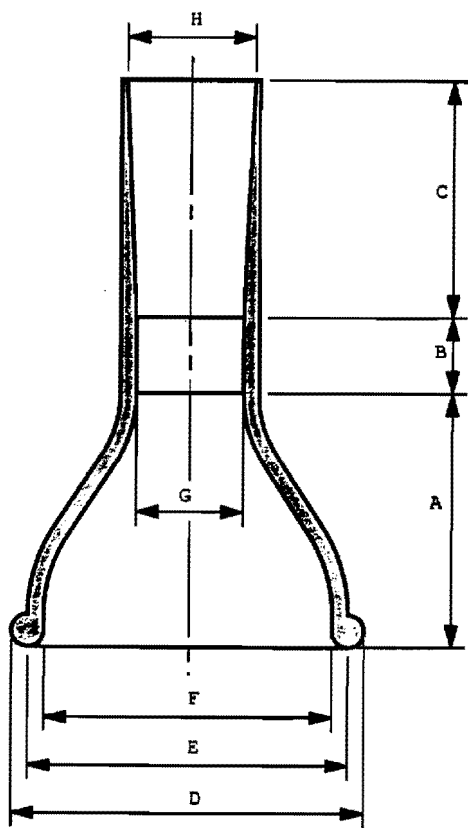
The French horn mouthpiece. (A) cup length, (B) throat length, (C) backbore length, (D) cup rim o.d., (E) cup peak diameter, (F) rim inner diameter (grip), (G) throat diameter, (H) backbore end diameter.
